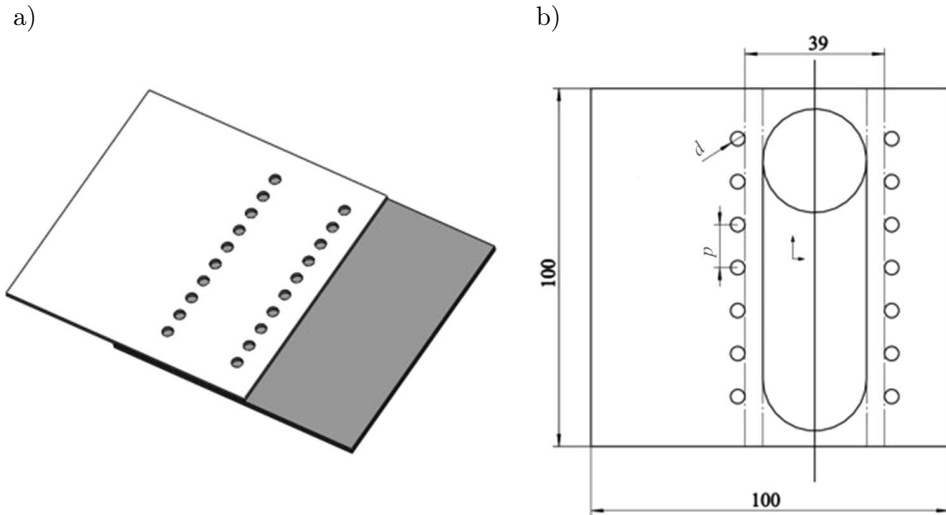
a) 3D view of plates; b) sketch map of the aluminum sheet and location of holes.
